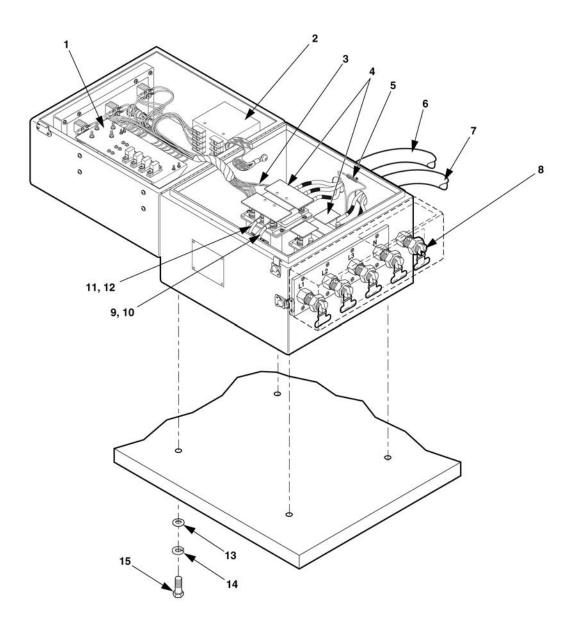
Switch/Box Assembly, 97403 13230E6950 (Sheet 1 of 3)
